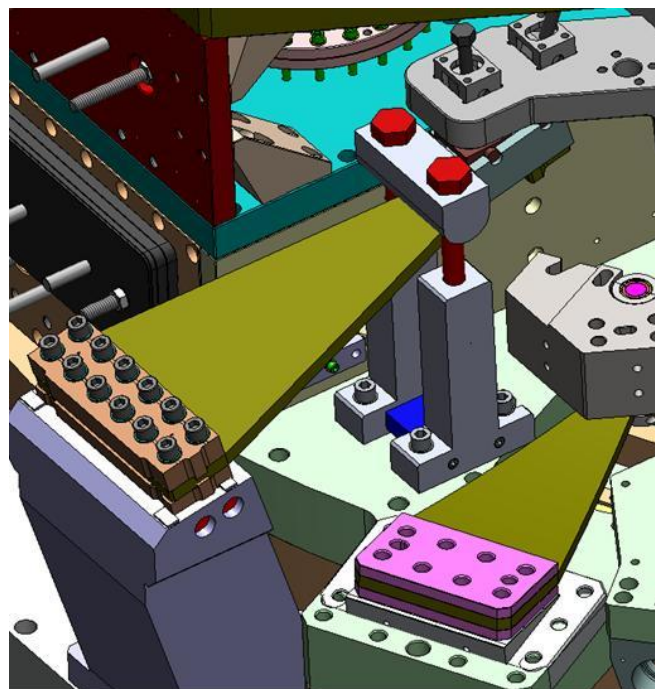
D0901872 Stage 0-1 Safety Mechanism fully assembled
